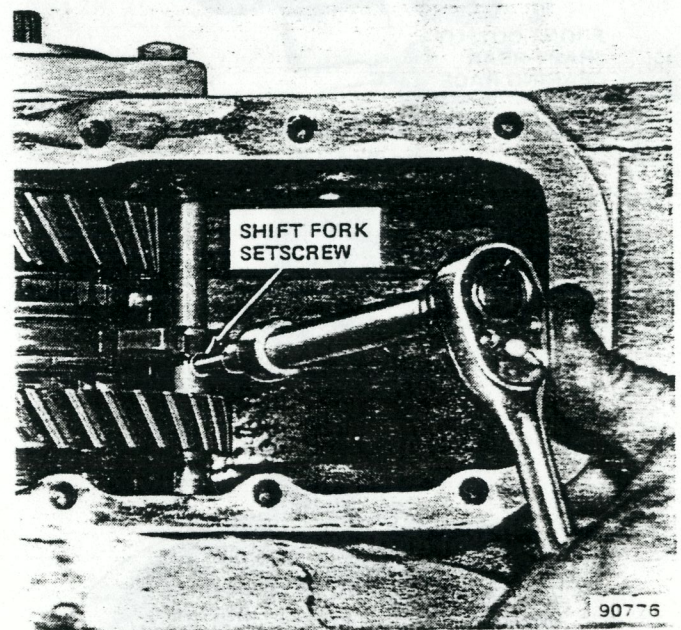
D-78 Shift Fork Setscrew Removal/Installation
